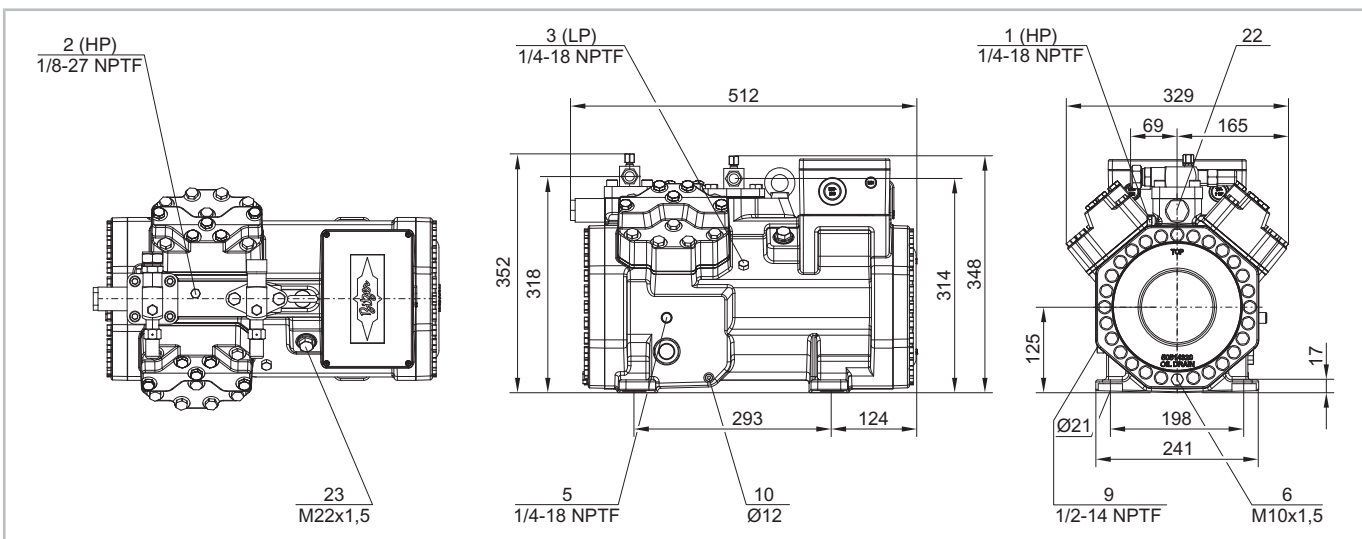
Dimensional drawing 4PTE-6(L)K .. 4KTE-10(L)K
